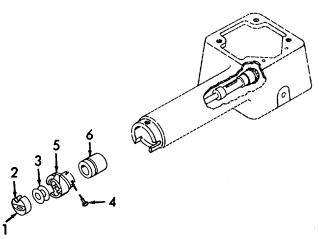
Bobbin and Rotary Sewing Hook Assemblies, Removal.
